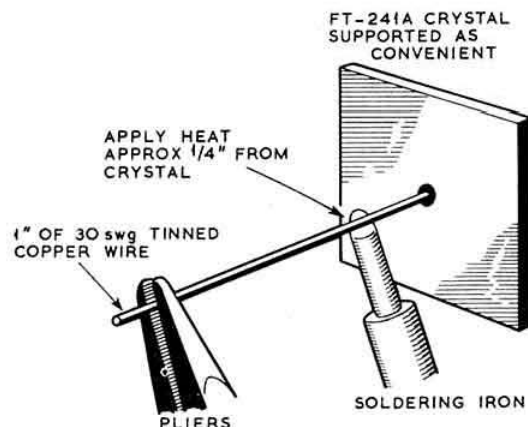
Soldering a new lead to the centre of a crystal plate.
